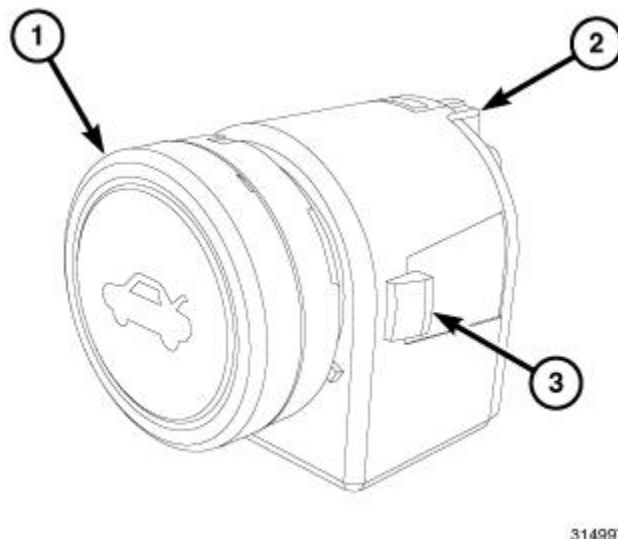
Release Switch, Receptacle & Single Integral Latch
